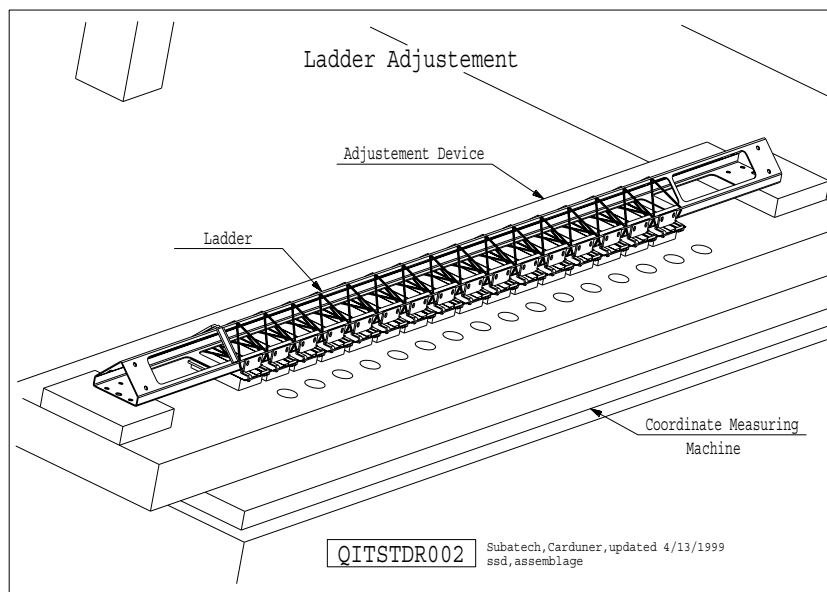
Ladder adjustment on a coordinate measuring machine.
